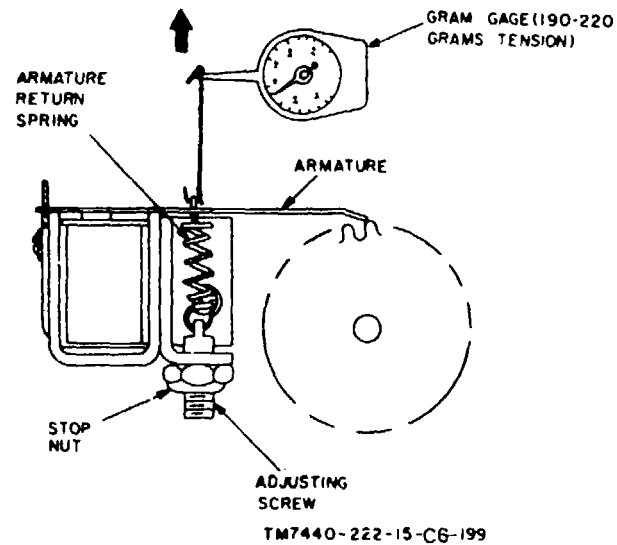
Capstan drive mechanism armature spring tension requirement.
